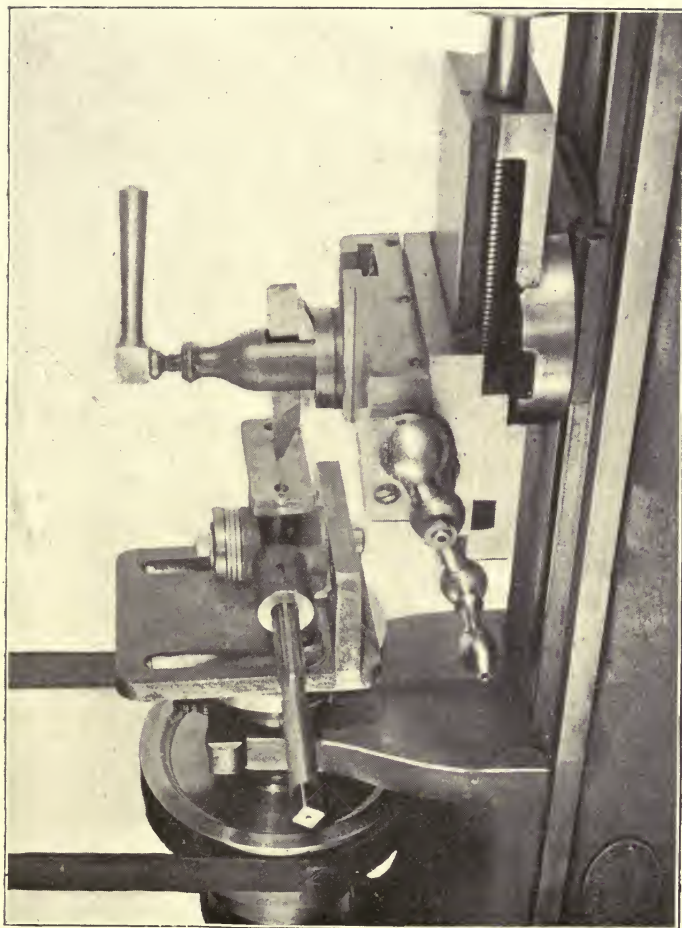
SETTING MAIN BEARING ON ANGLE PLATE TO FACE OFF BOTTOM.
